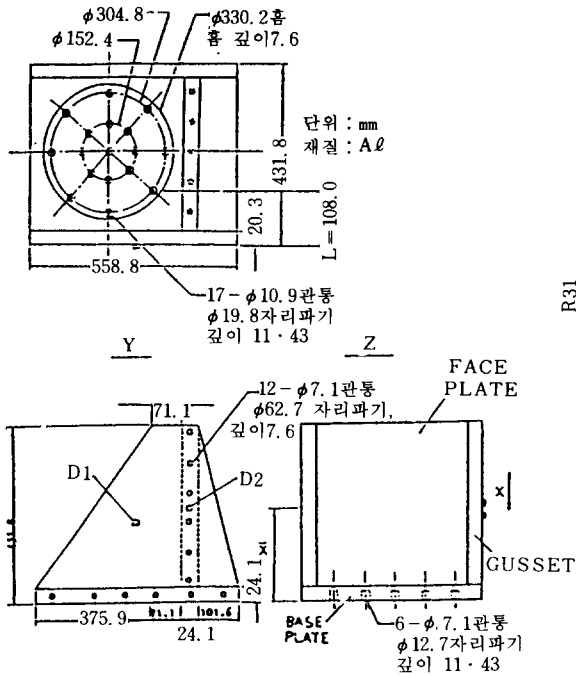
Dimension and Shape of Complex Shaped Fixture V
